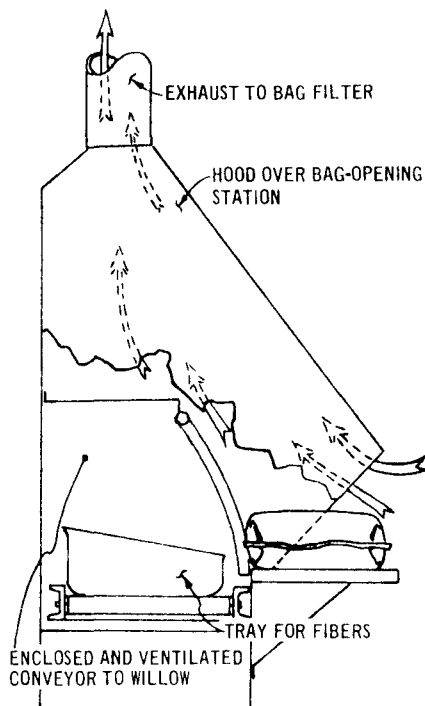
Bag opening and conveying station with dust collecting hood.
